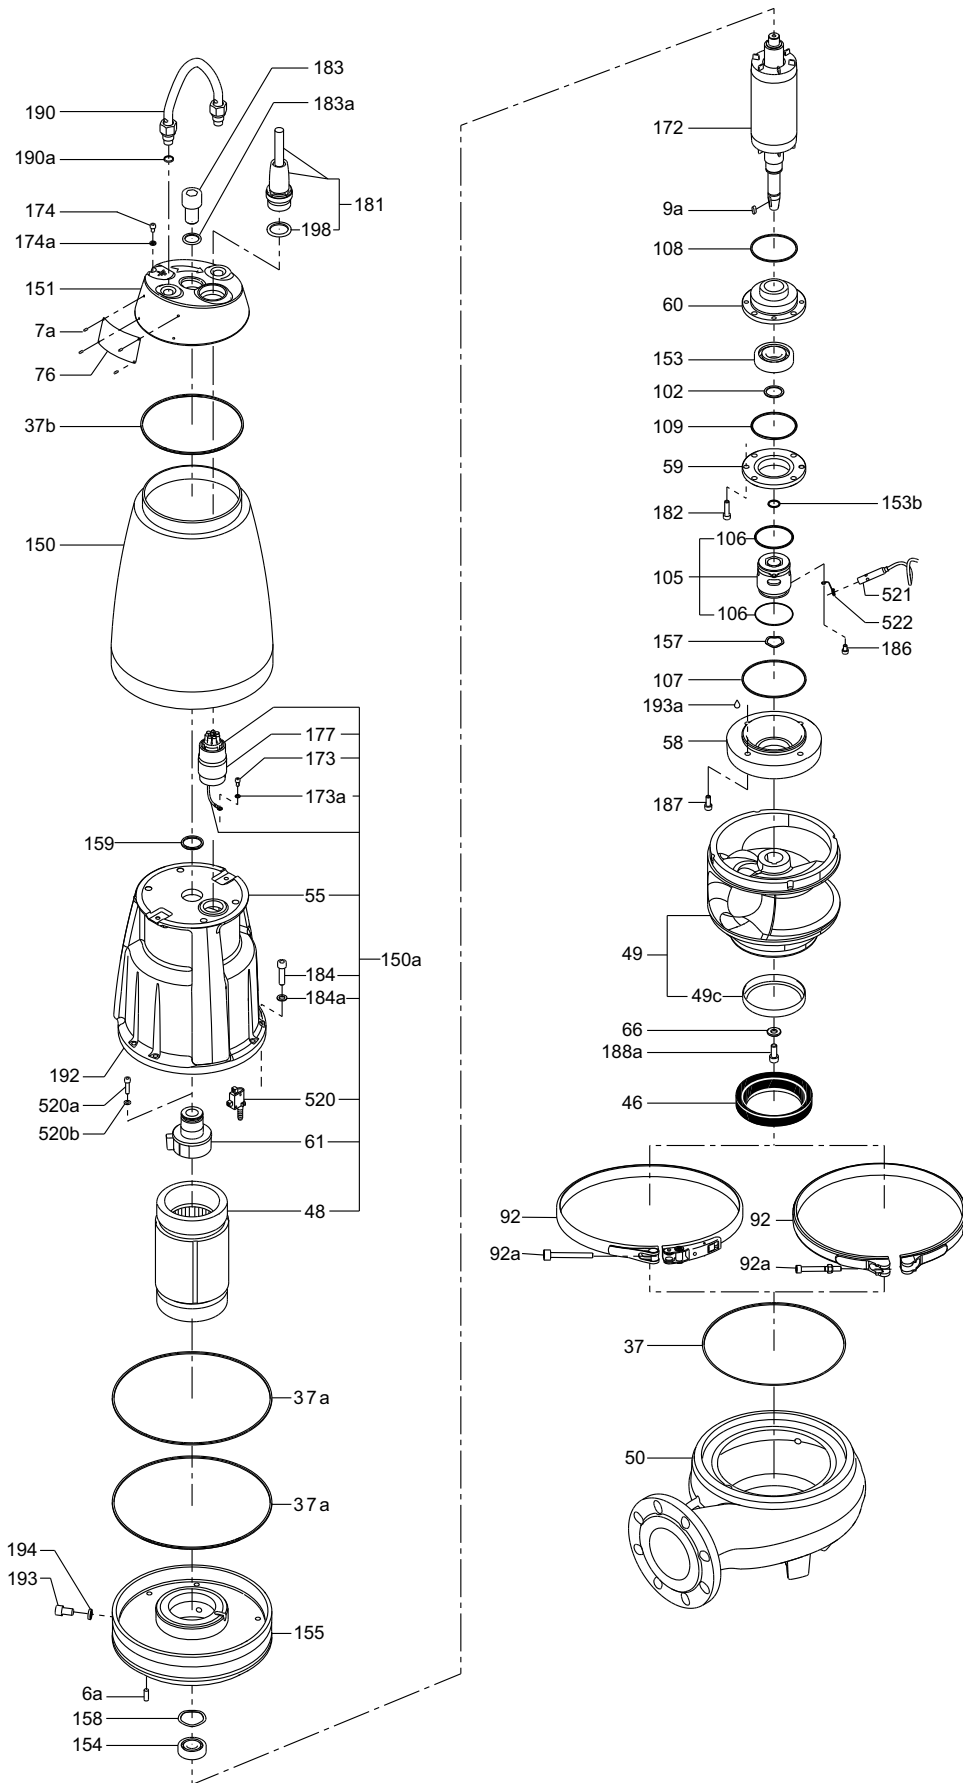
Exploded view, SE1 pump with S-tube® impeller, sensor version
